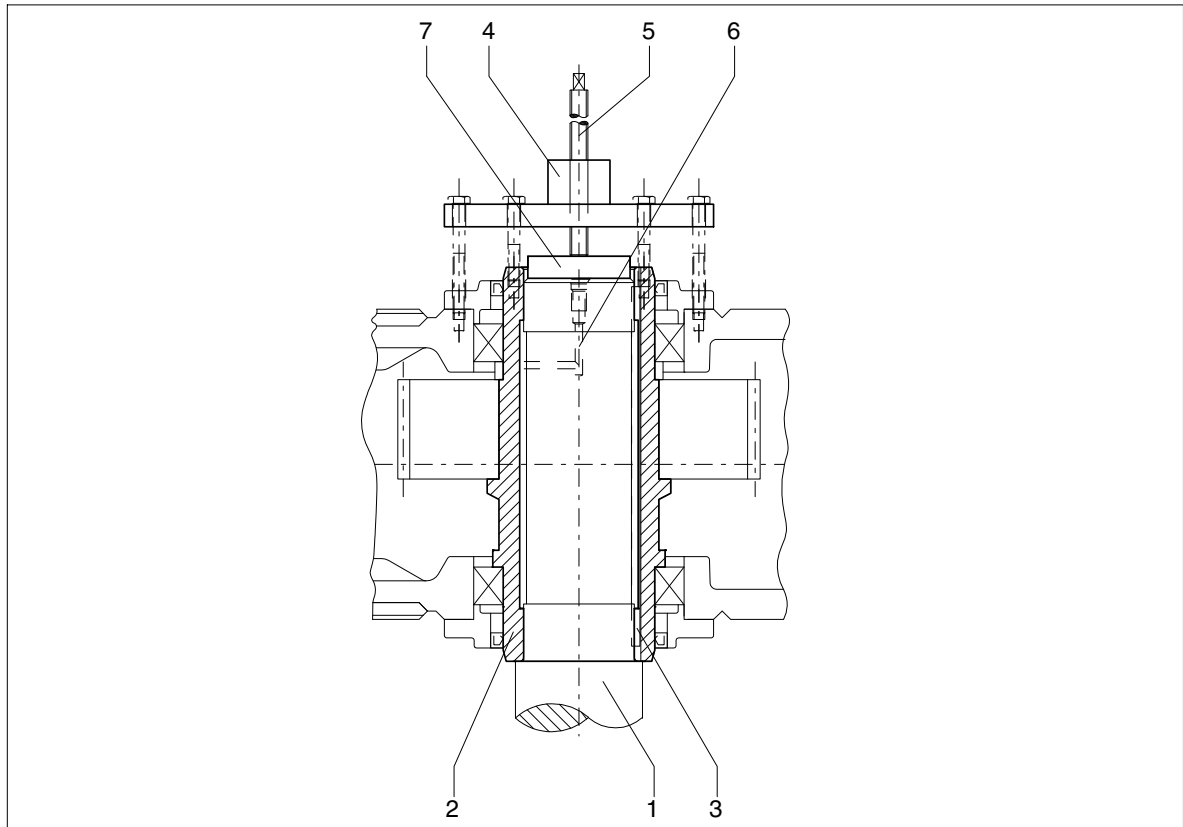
Hollow shaft with parallel keyway, demounting with hydraulic lifting unit
